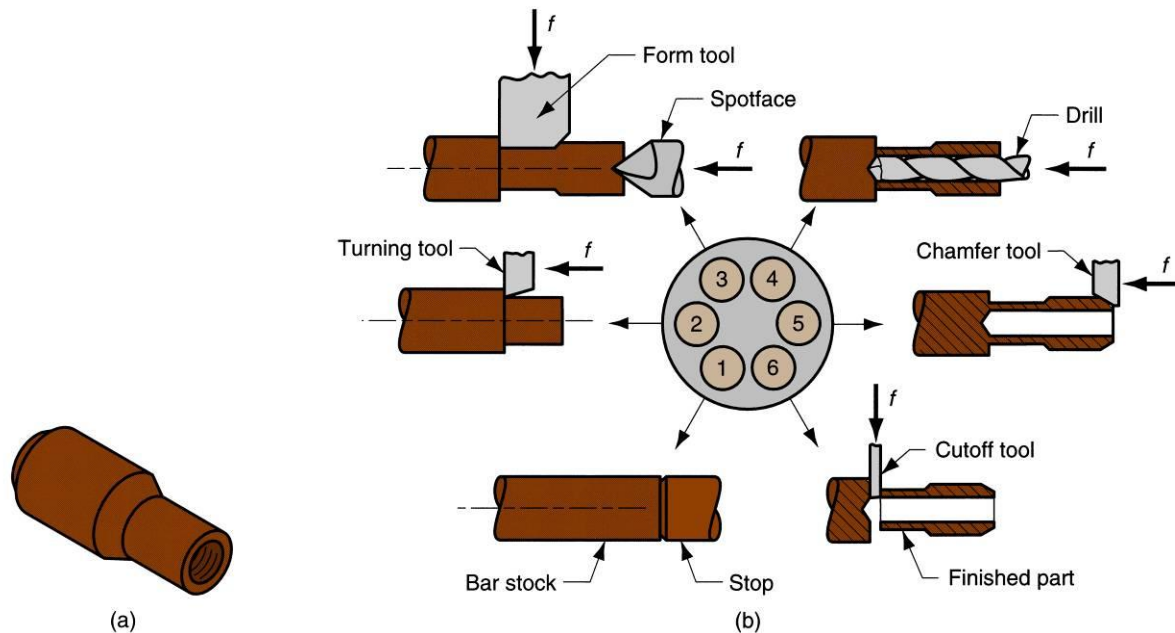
(a) Part produced on a six-spindle automatic bar machine; and (b) sequence of operations to produce the part: (1) feed stock to stop, (2) turn main diameter, (3) form second diameter and spotface, (4) drill, (5) chamfer, and (6) cutoff.
